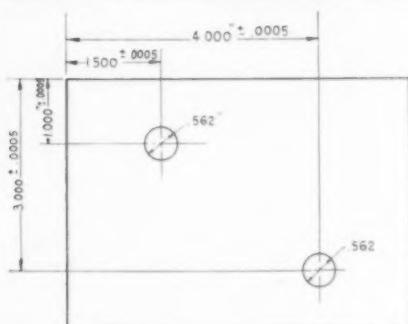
Method of laying out surface plate and size blocks on lathe. Locating time, each hole, 90 seconds. Accuracy obtained:
